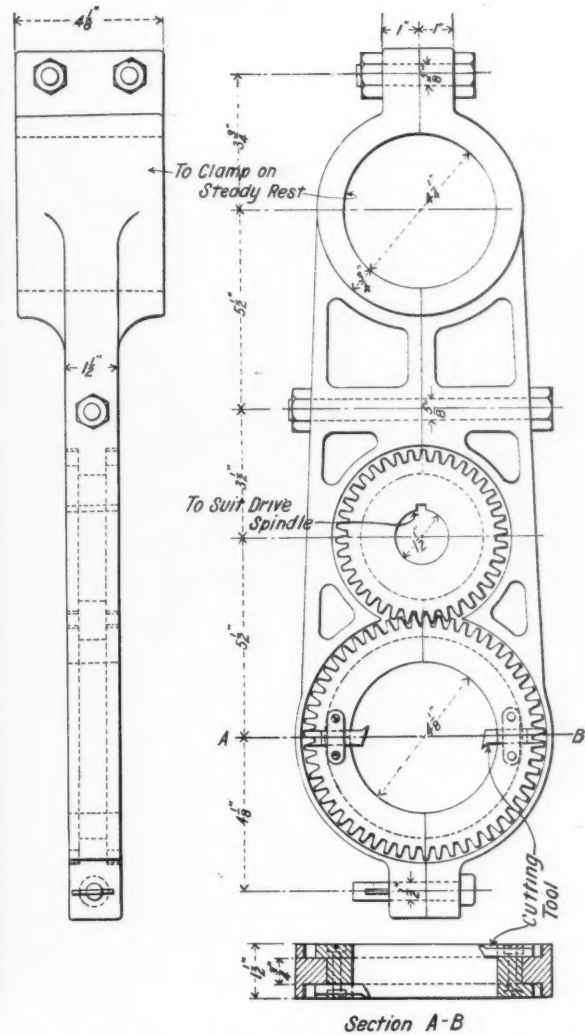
Tool for Turning Wrist Pins on Crossheads.
